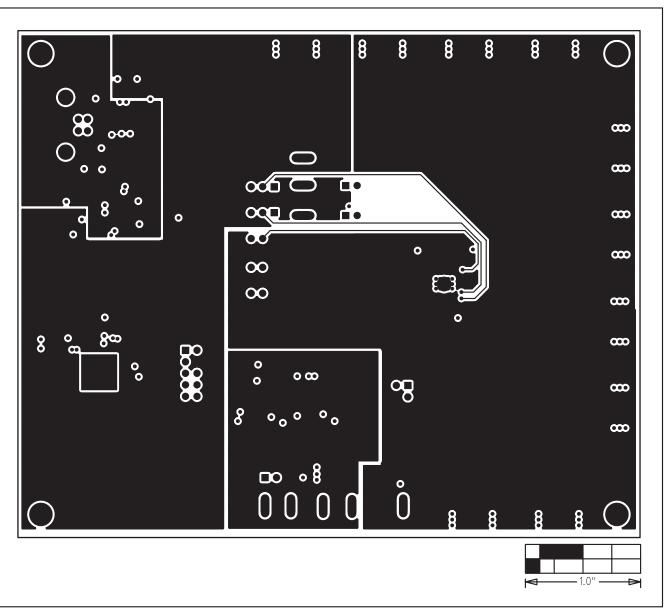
MAX9132 EV Kit PCB Layout—Inner Layer 3
